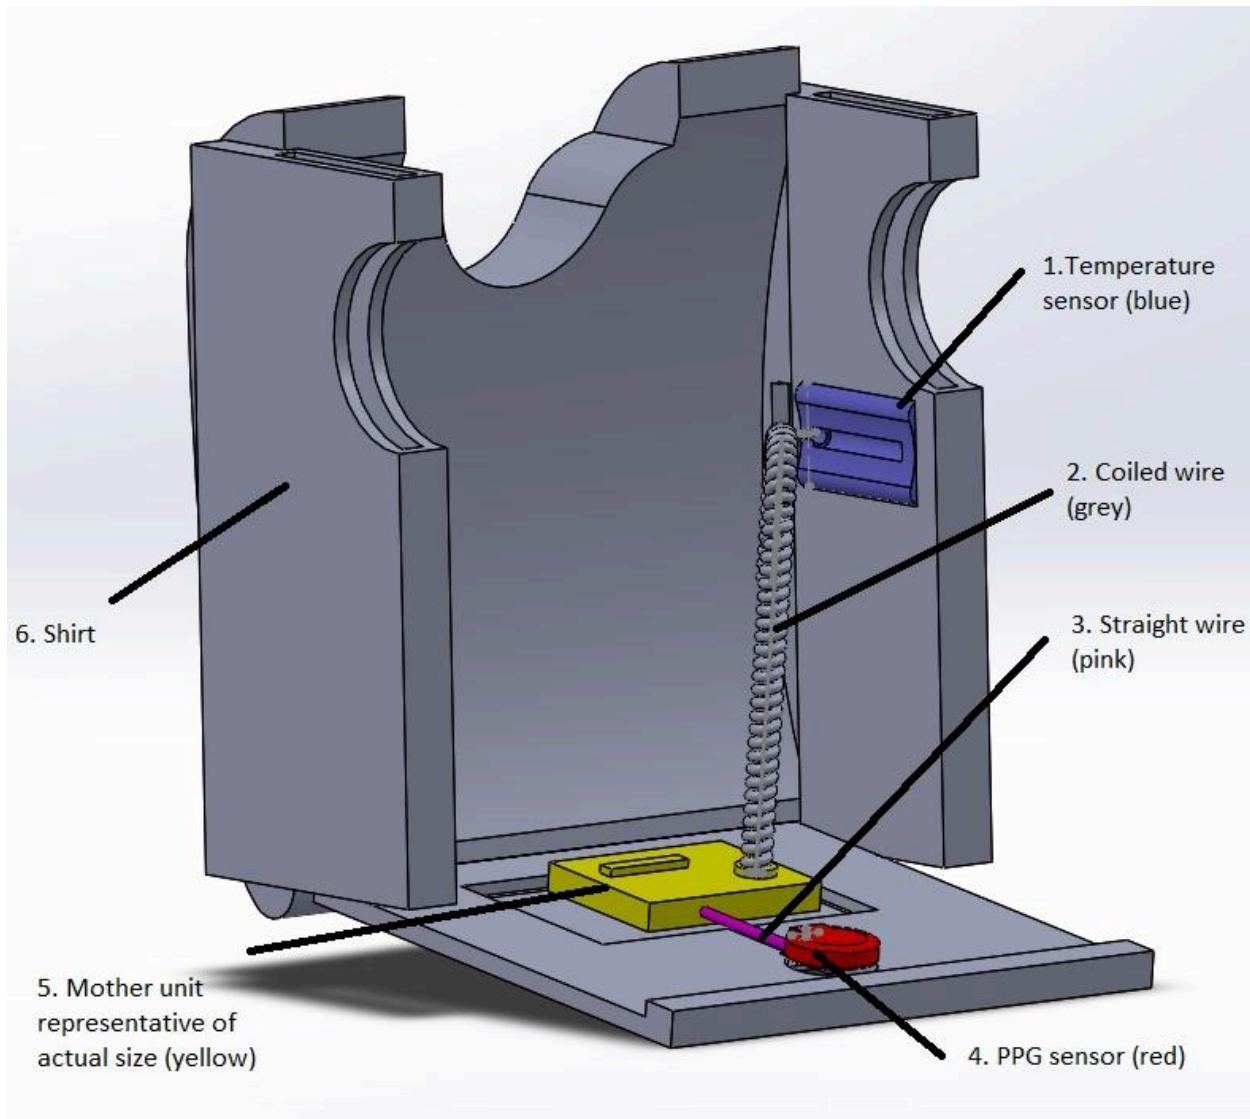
Full assembly showing smaller Mother Housing, heart rate sensor and temperature sensor casings.
